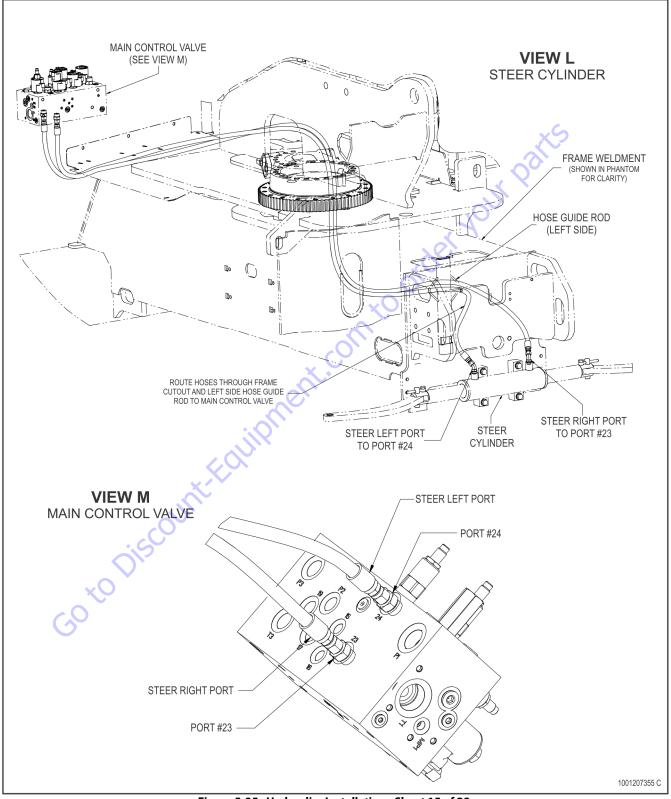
Hydraulics Installation - Sheet 15 of 28
